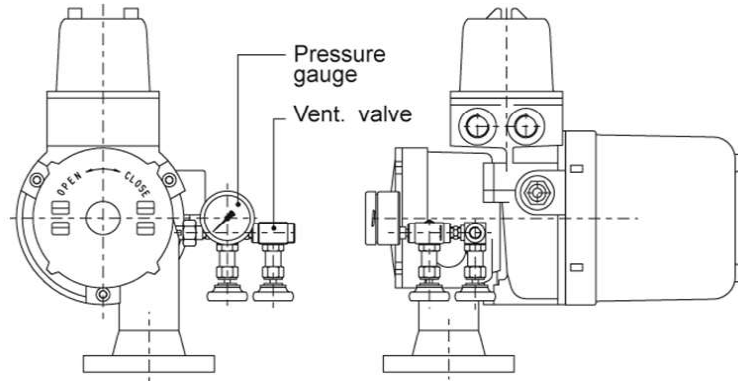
Mounting a Pressure Gauge Set on a 954 SmartServo FlexLine Gauge
